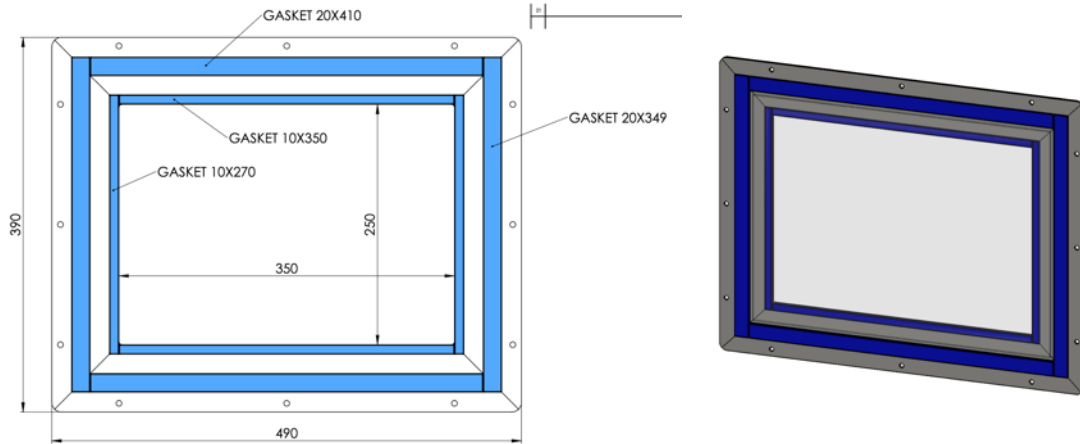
EMC viewing window and gasket dimensions drawing (left) and the 3D model (right).
